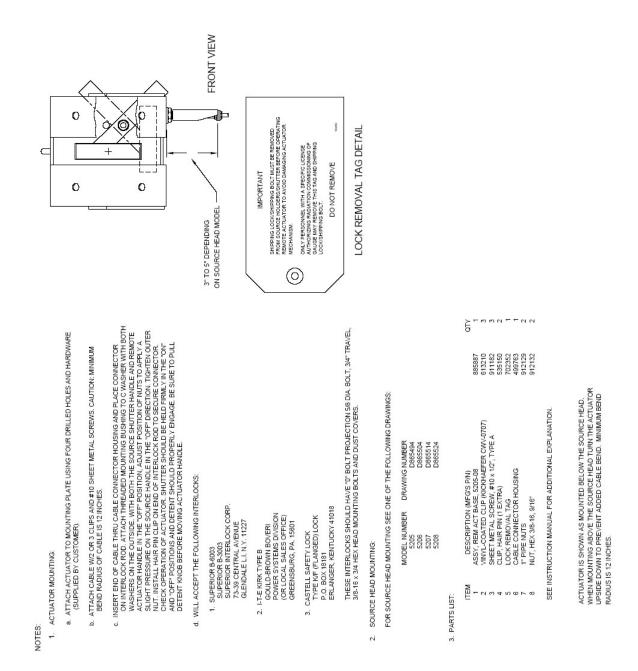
867269: Mounting instructions, remote manual actuator, Models 5205–5208 (sheet 1 of 2)
